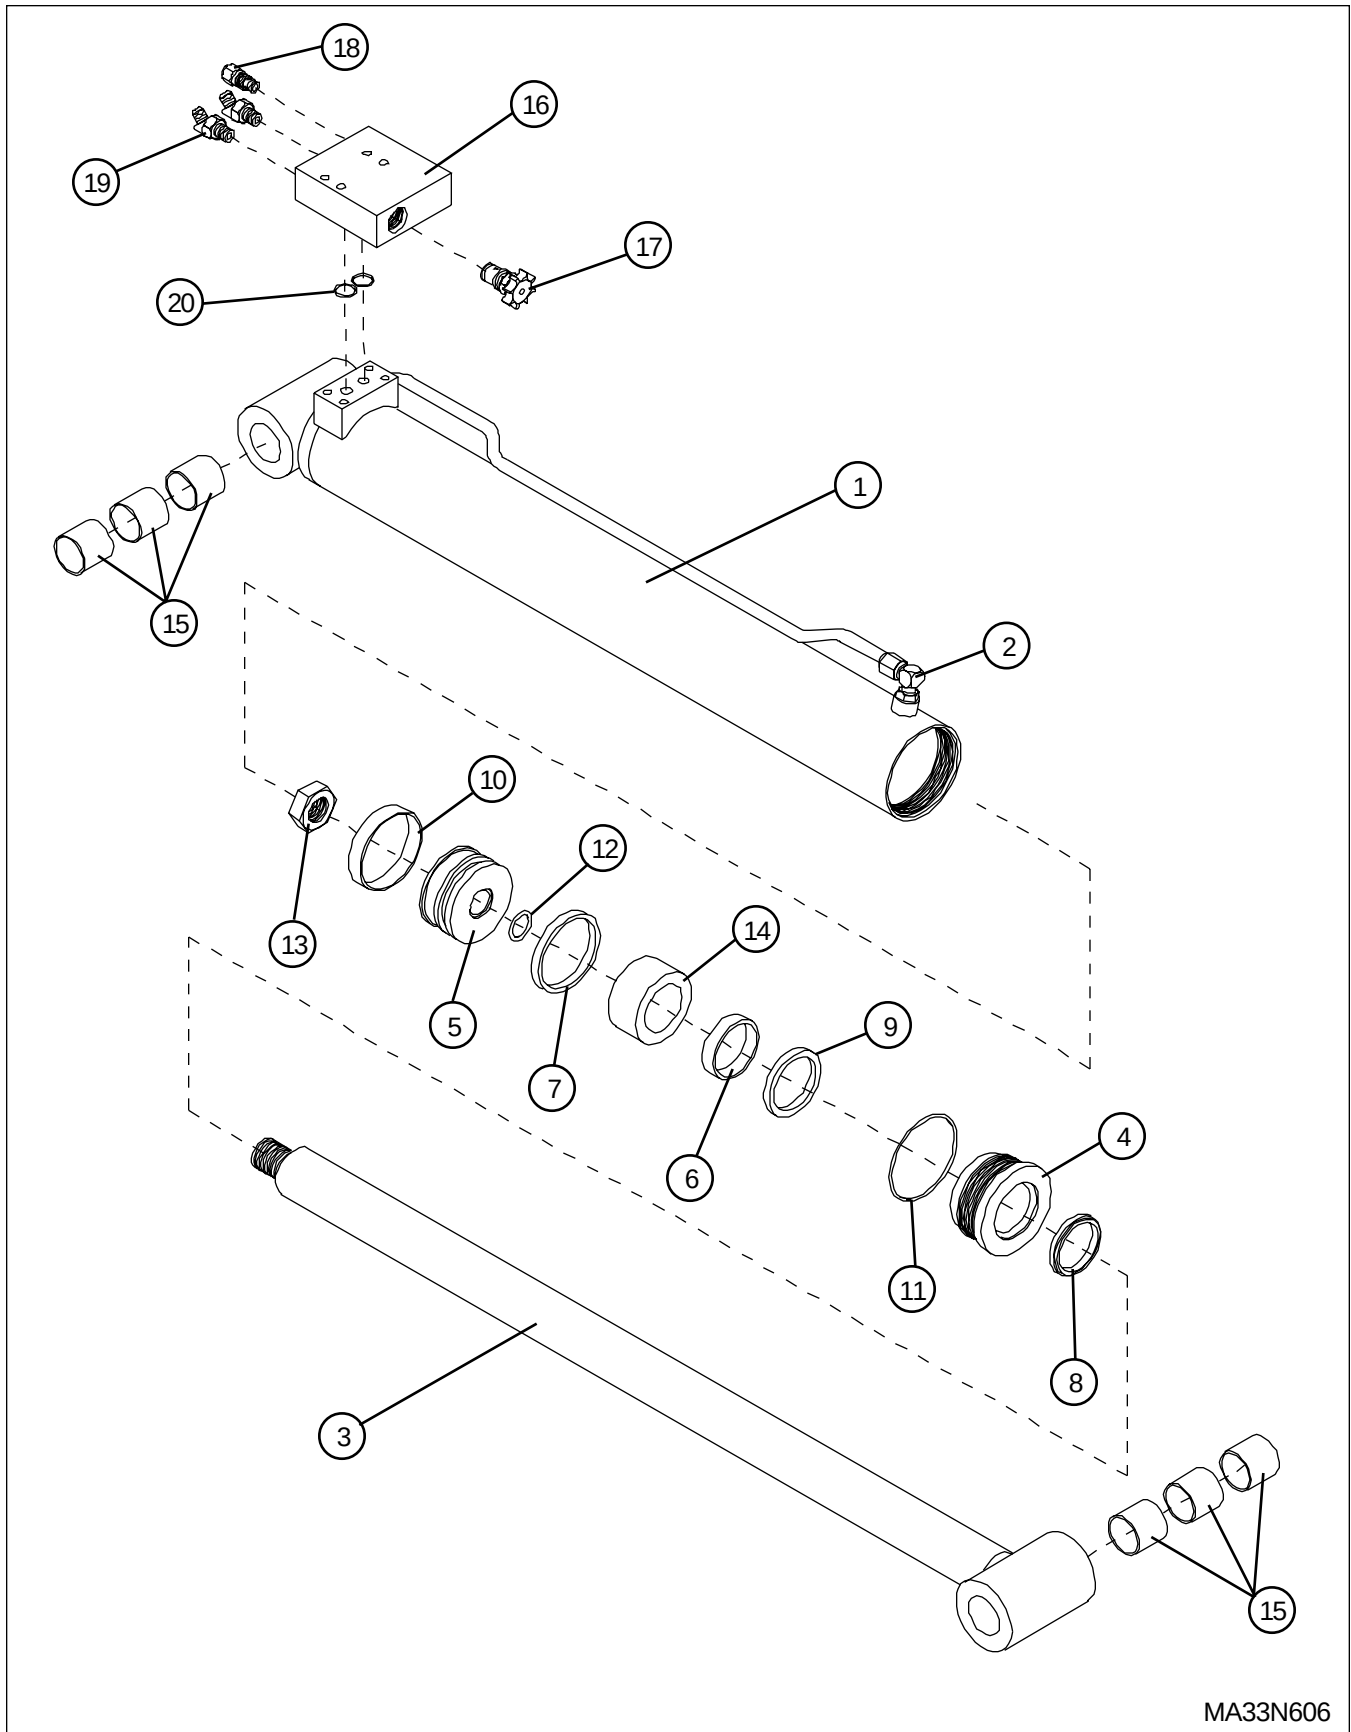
JIB LIFT CYLINDER ASSEMBLY
